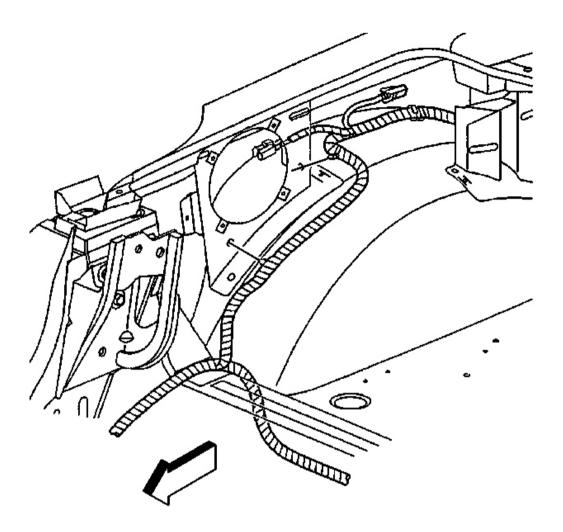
Front Body Wiring Harness Retainers At Rear Speaker Housing Courtesy of GENERAL MOTORS CORP.
